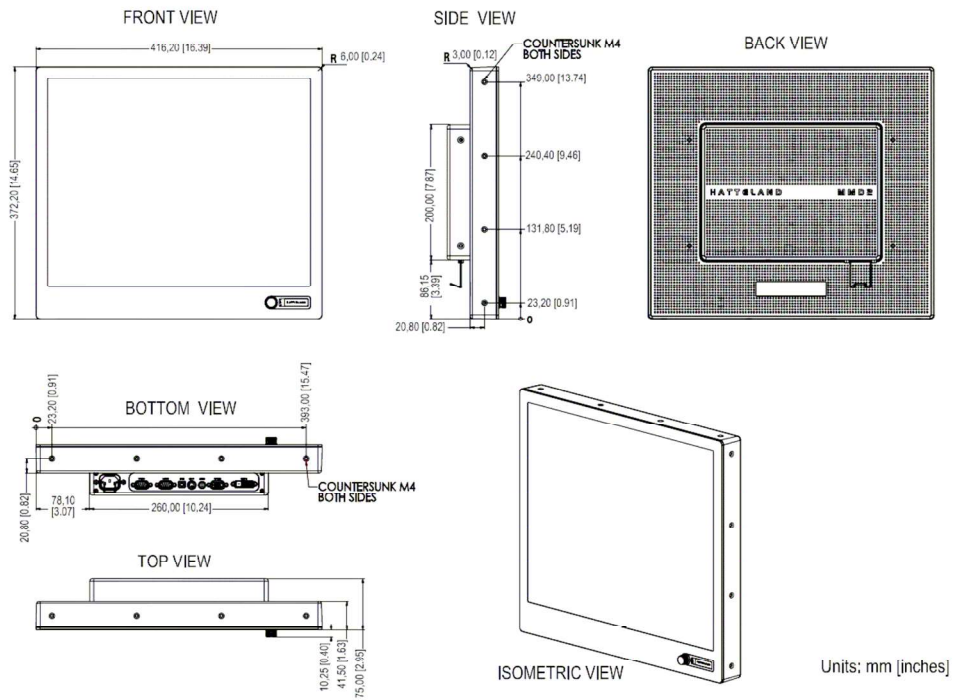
19" TFT Hatteland HD19T03 MMD. Standard View
